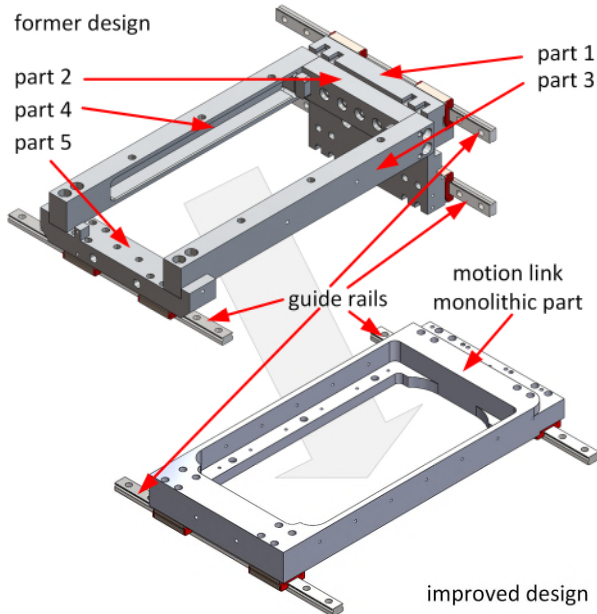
Design improvements of motion link. Bottom-right: improved design.
